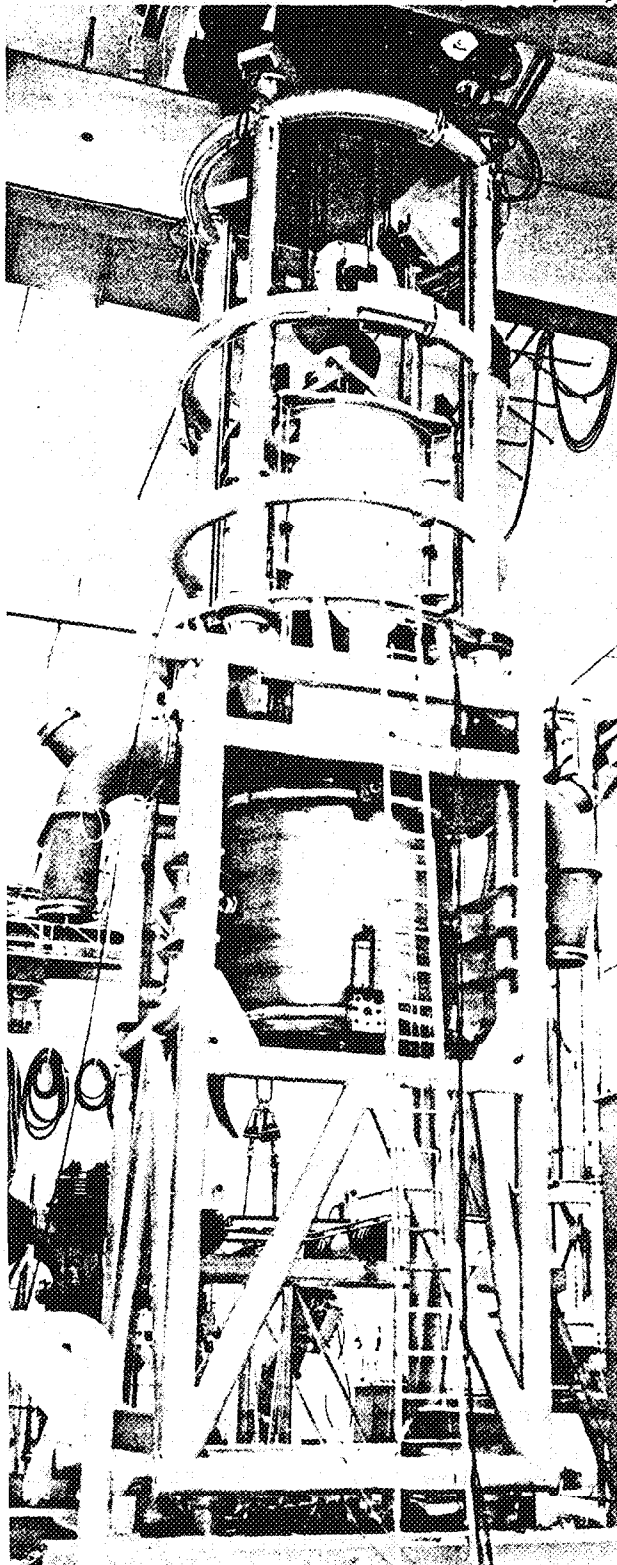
Upending fixture in vertical position with core-removal fixture on top
